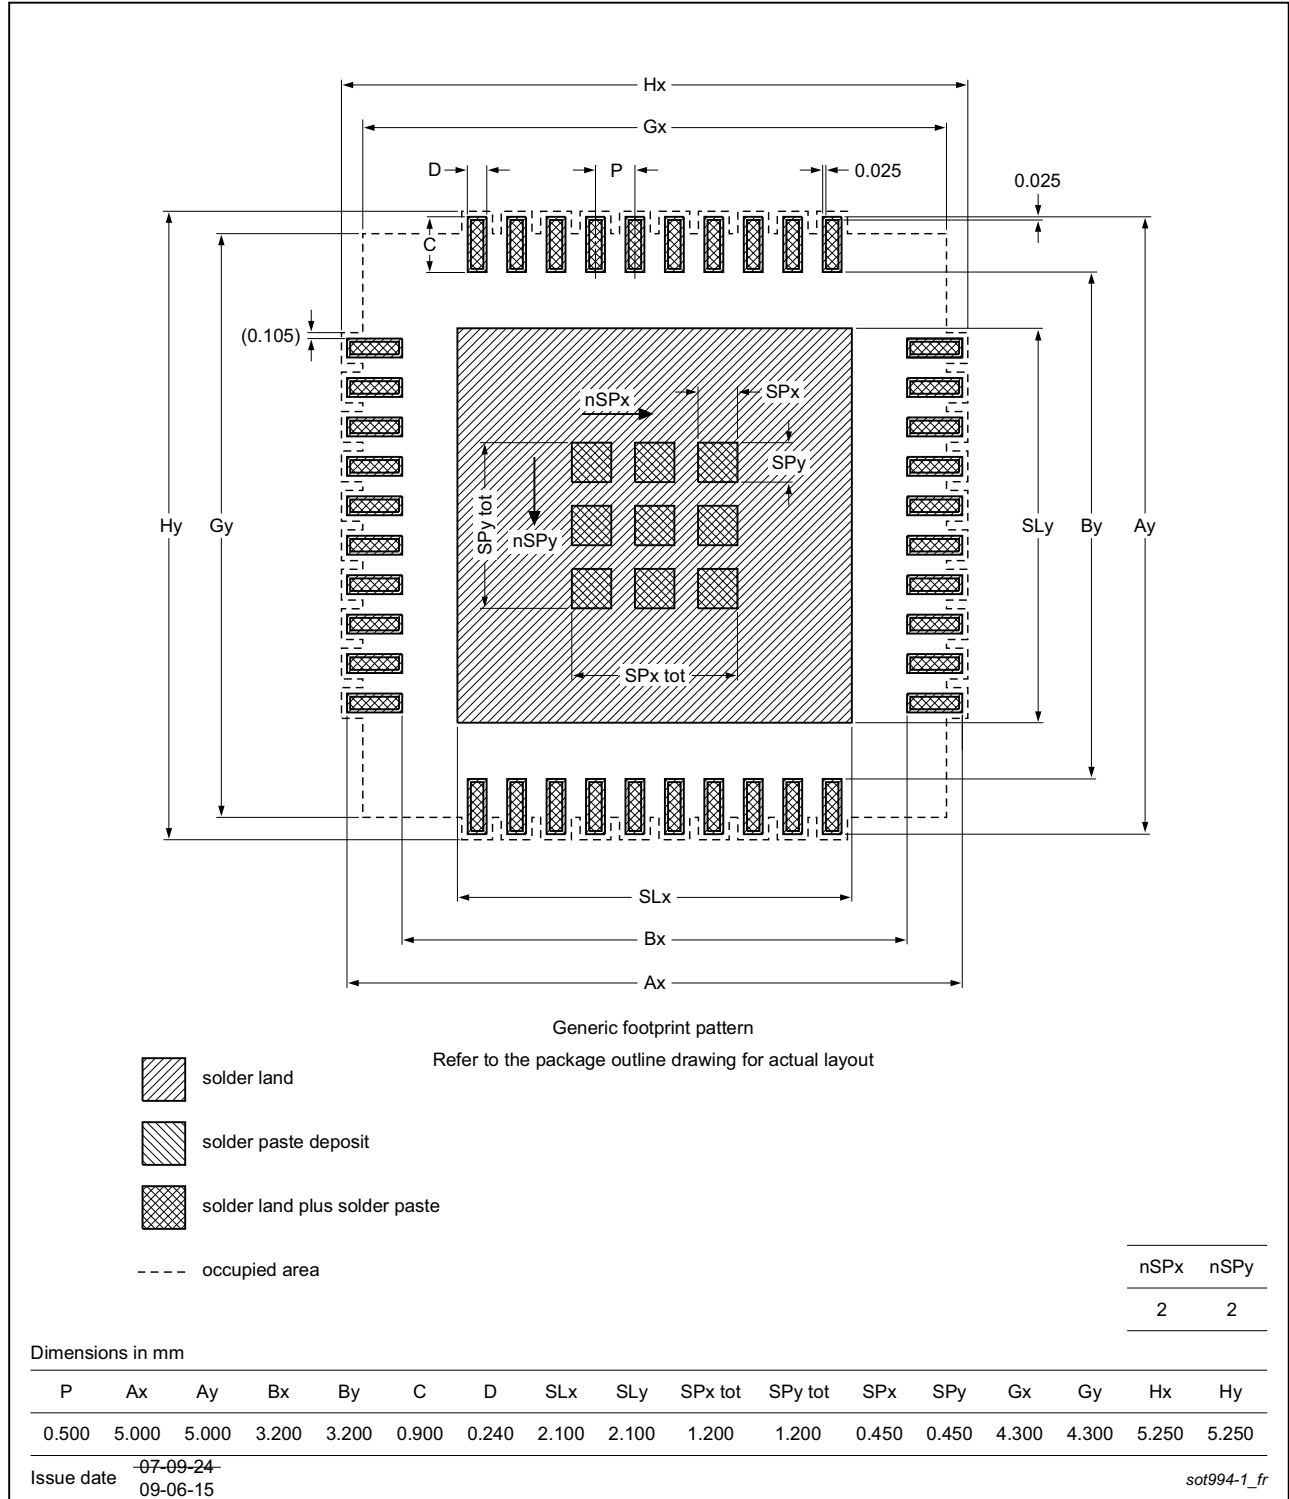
PCB footprint for SOT994-1 (HVQFN24); reflow soldering
